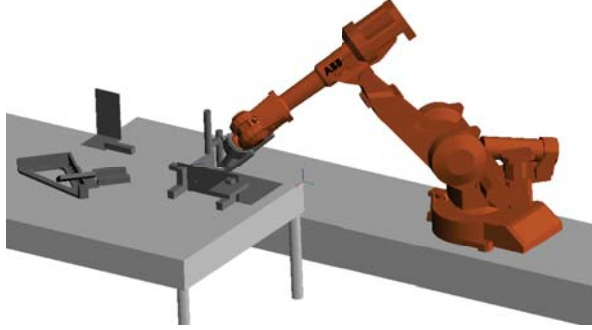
Welding robot tasked to perform a set of welds
